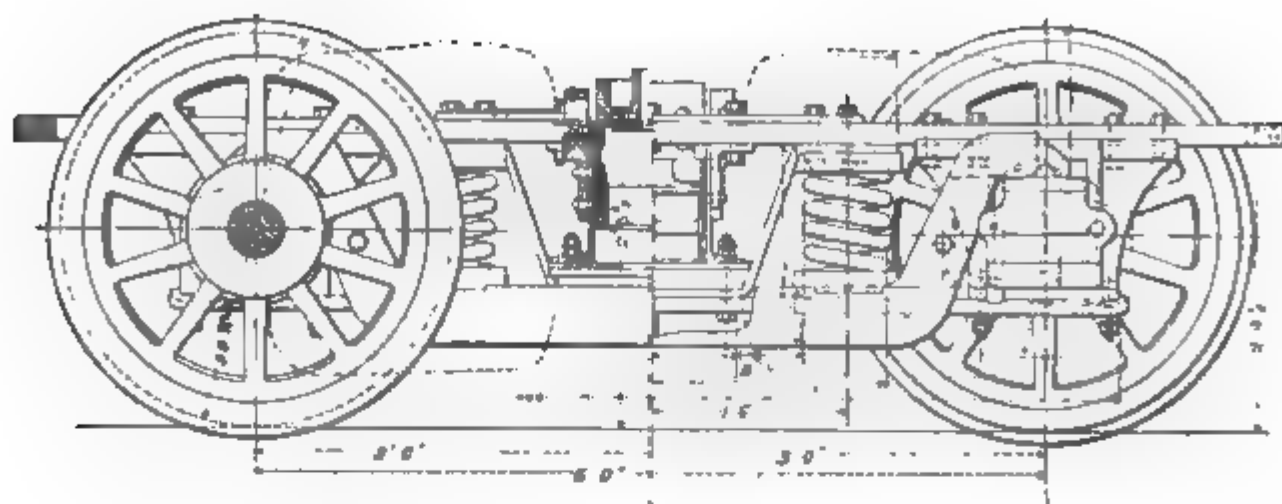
Electric Geared Locomotive Truck—Side Elevation.
